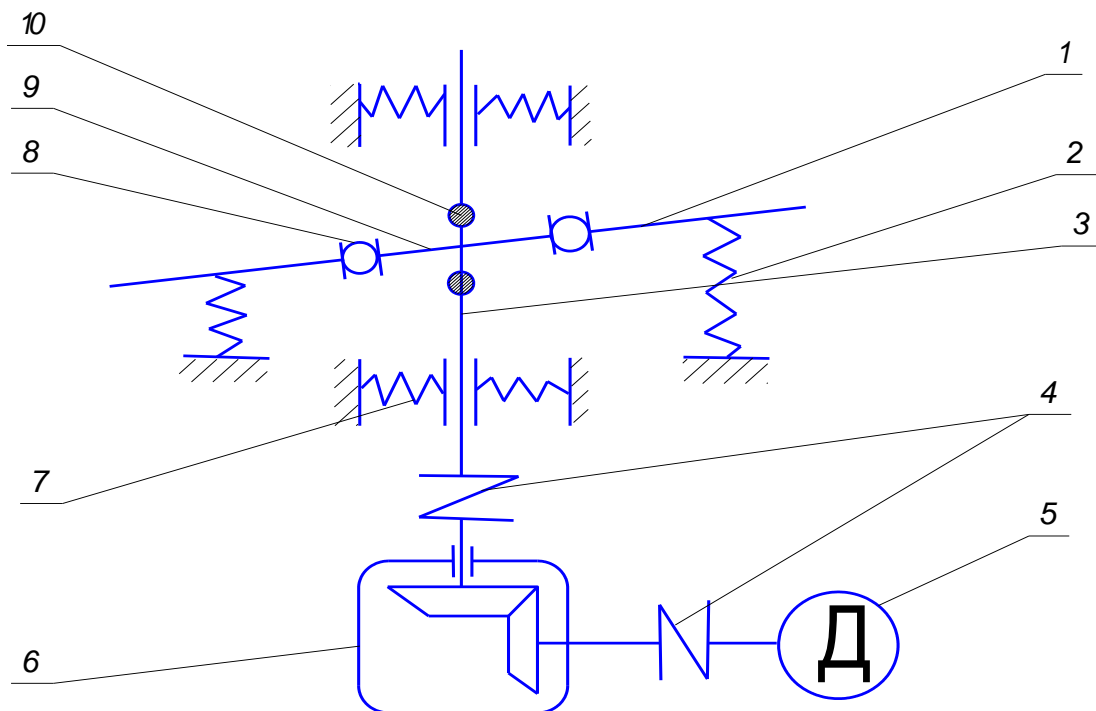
Scheme of the vibrating drive of the screen: 1 – vibroplatform; 2, 7 – elastic elements; 3 – shaft; 4 – coupling; 5 – electric motor; 6 – conical reductor; 8 – bearing assembly; 9 – sleeve; 10 – counterweight
